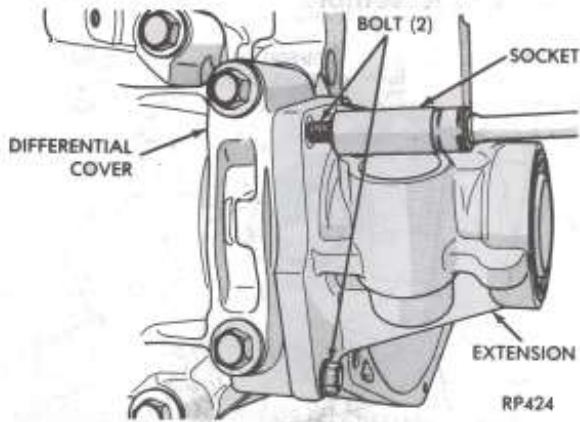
Remove or Install 2 Extension Outer Bolts (A-520/A-555)
